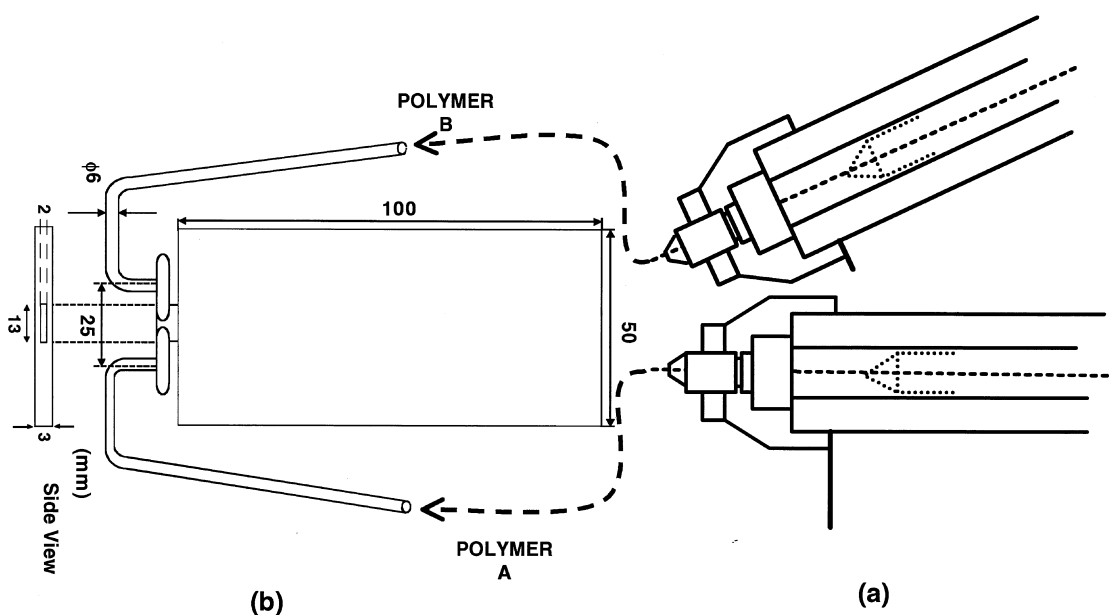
(a) Co-injection molding nozzle section. (b) Cavity geometry.
